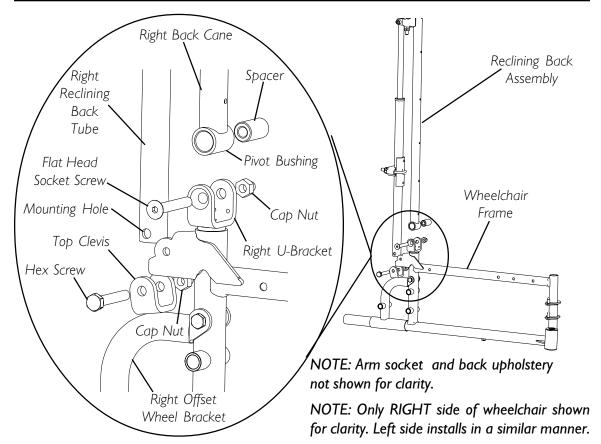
INSTALLING THE RECLINING BACK ASSEMBLY
